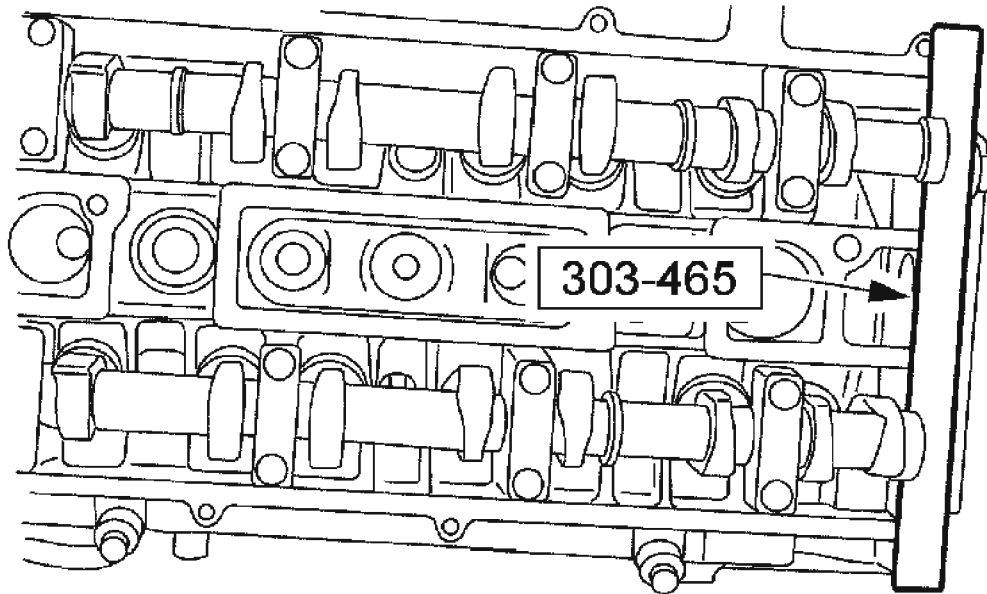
Locating Cam Holding Area And Sprocket Bolt
